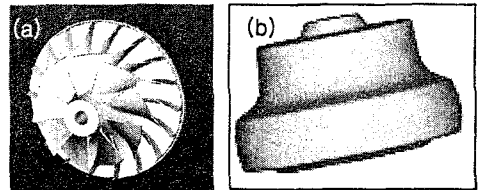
(a) the last processed shape and (b) forged part of compressor wheel
